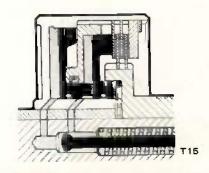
CUTAWAY VIEW OF TOP AND REVERSE CLUTCH
